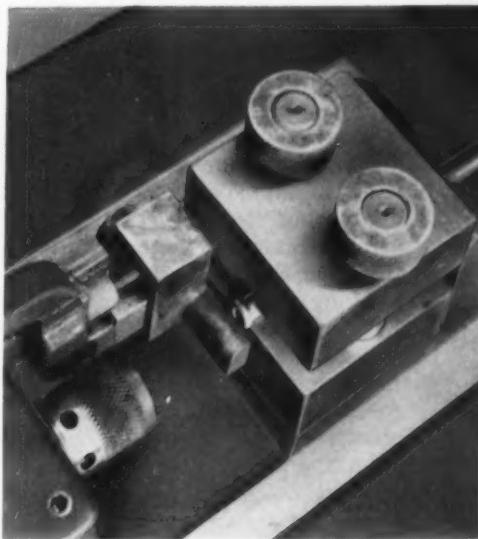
The same machine that is used for performing tube reduction operations "doubles" in offset-beading the end of a tube.
